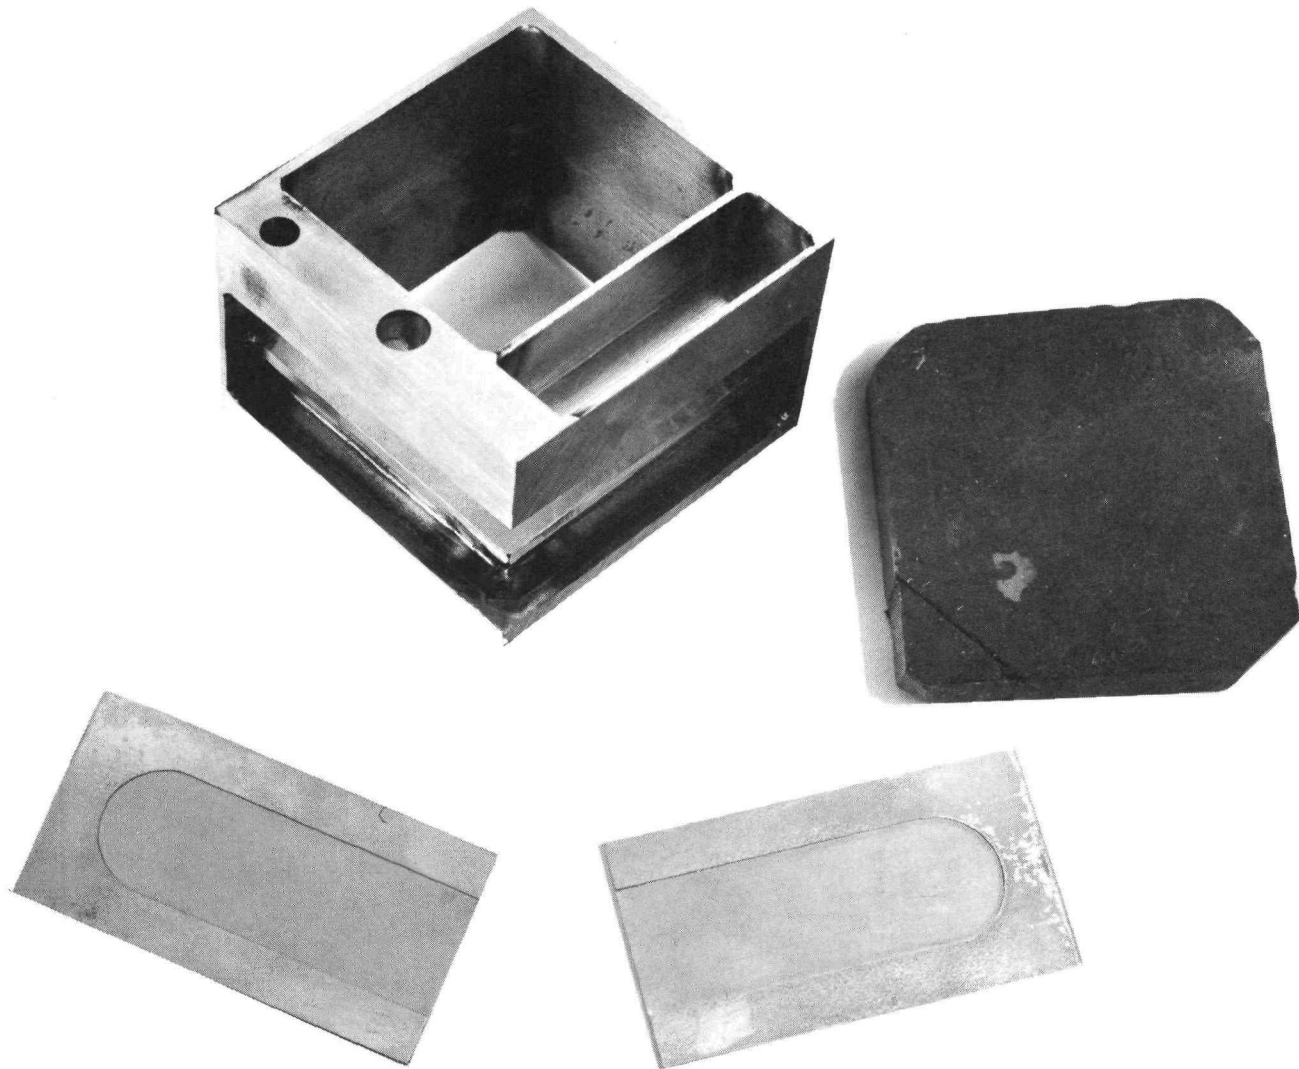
WELD SAMPLES FOR SIDE SKIN DESIGN MODIFICATION
